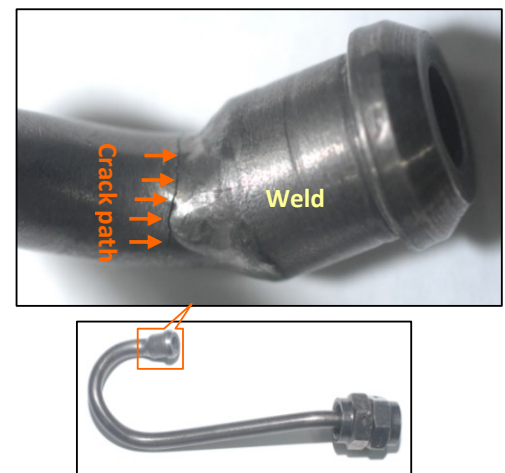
Photograph of the cracked connecting pipe, crack path is indicated by arrows
